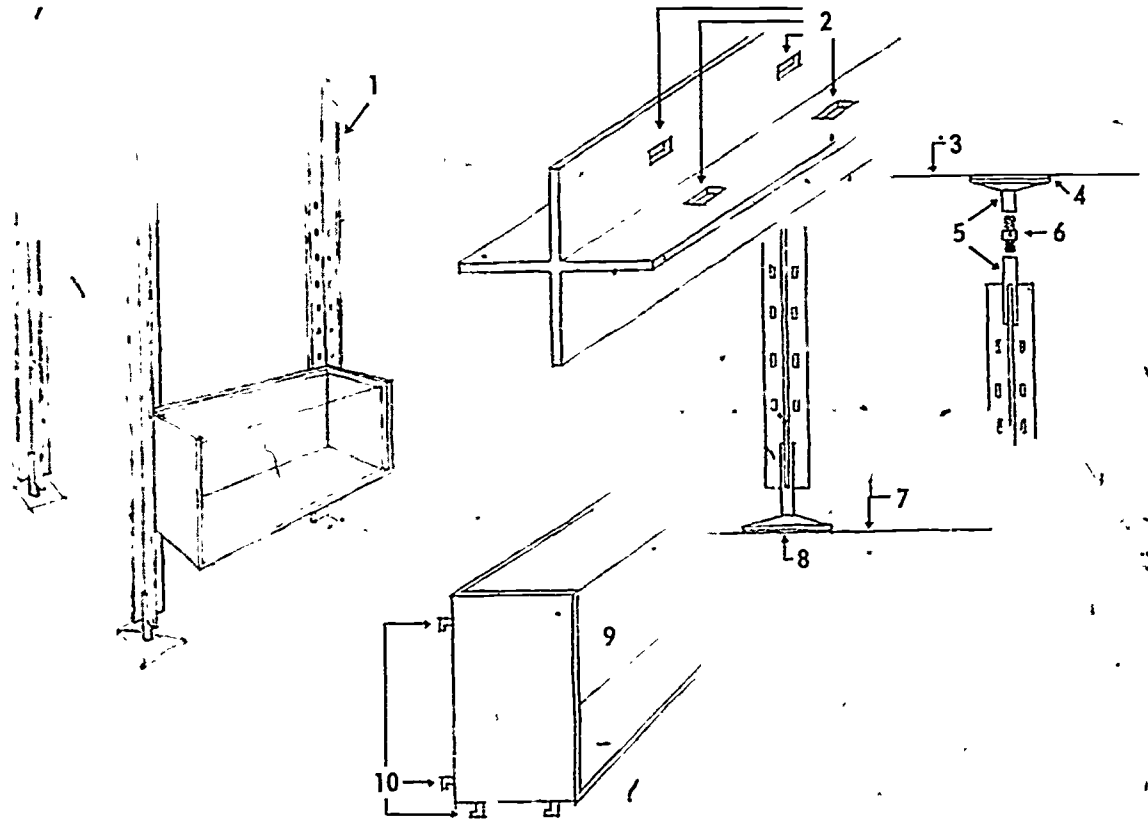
Adjustable case mounting. 1, anodized aluminium poles, 2, notches to receive cases, panels and shelves; 3, ceiling; 4, foam rubber, 5, threaded aluminium pipe; 6, screw jack; 7, floor; 8, double-faced industrial tape to prevent movement, 9, case with wooden back, floor and two sides (glass slides into notched grooves), 10, hooks for attachment to vertical poles. Case can be hung horizontally or vertically.
